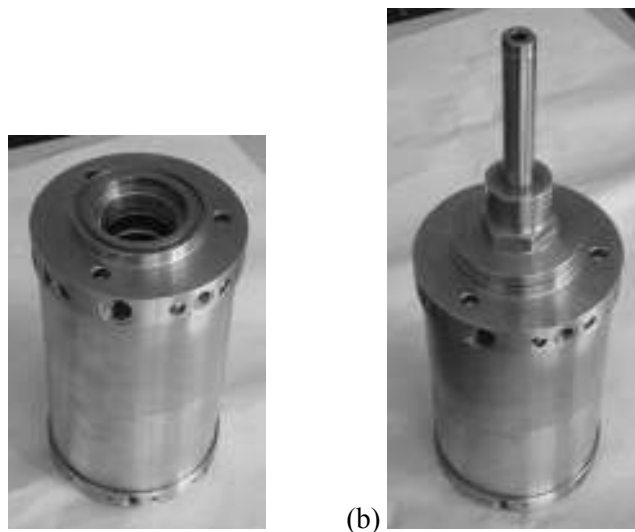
(a) THM reactor without piston and removable cover, (b) Overview of the THM machine
